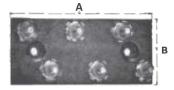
6-point terminal board, Type EB-4, Cat. 2860351G3
